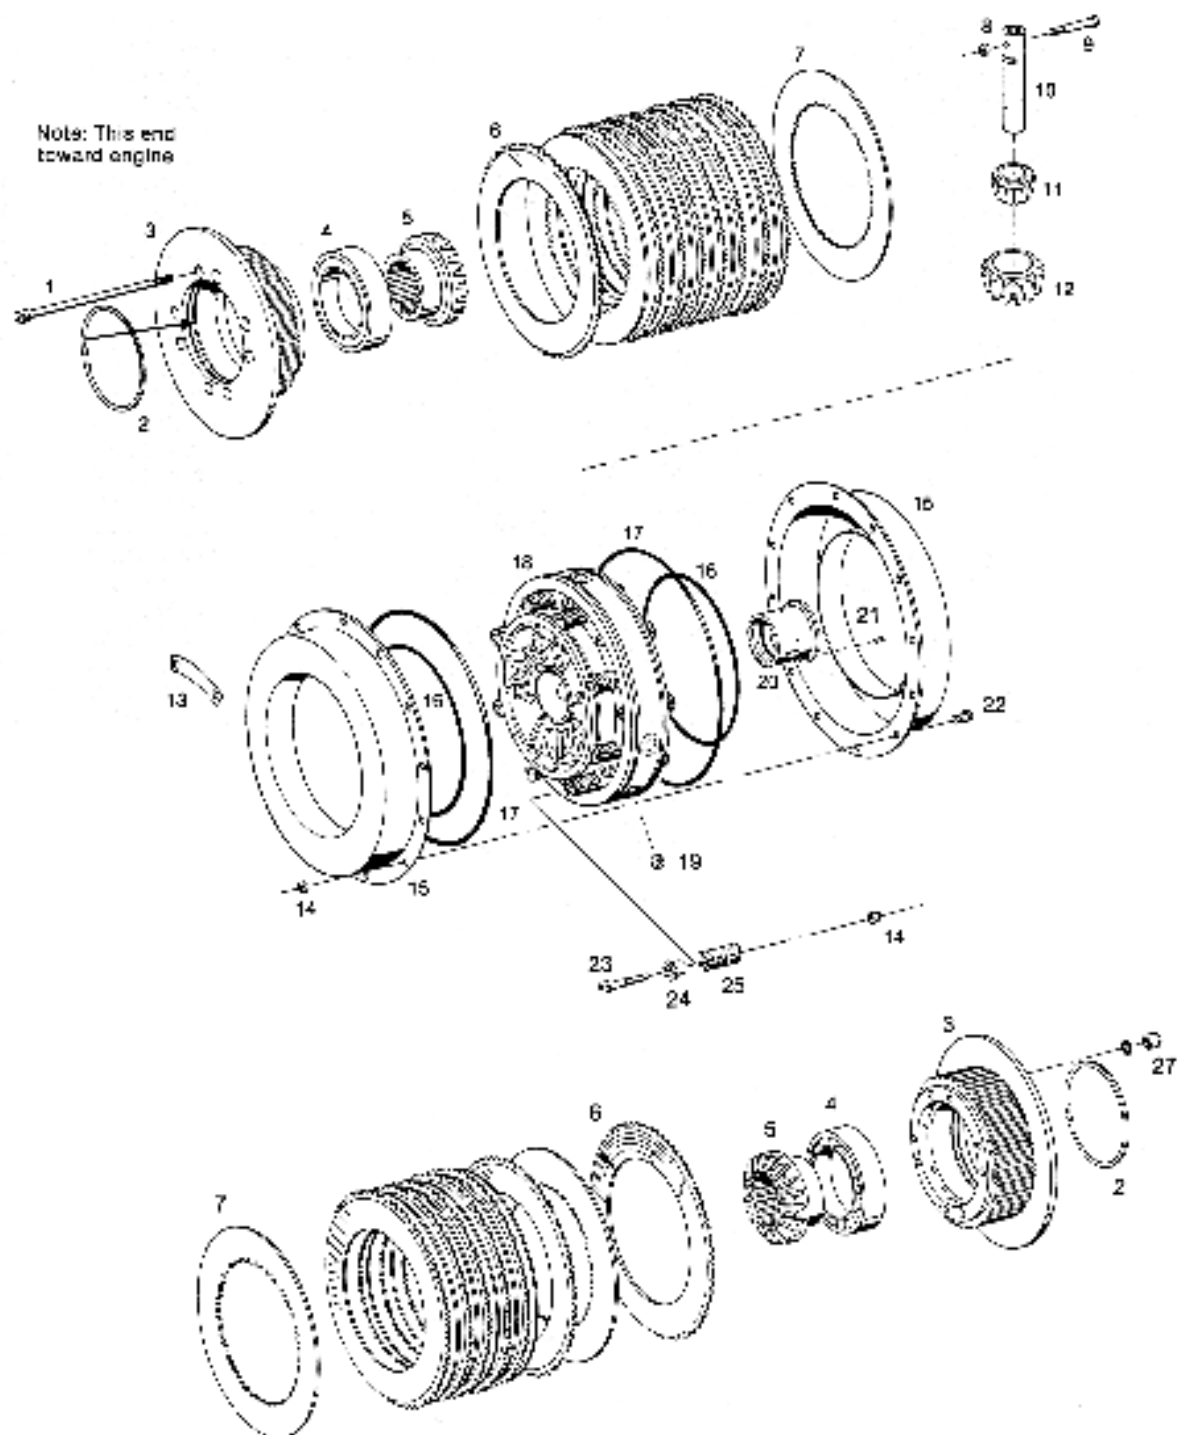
HP 500 Clutch Assembly No. 1-00100-2419
